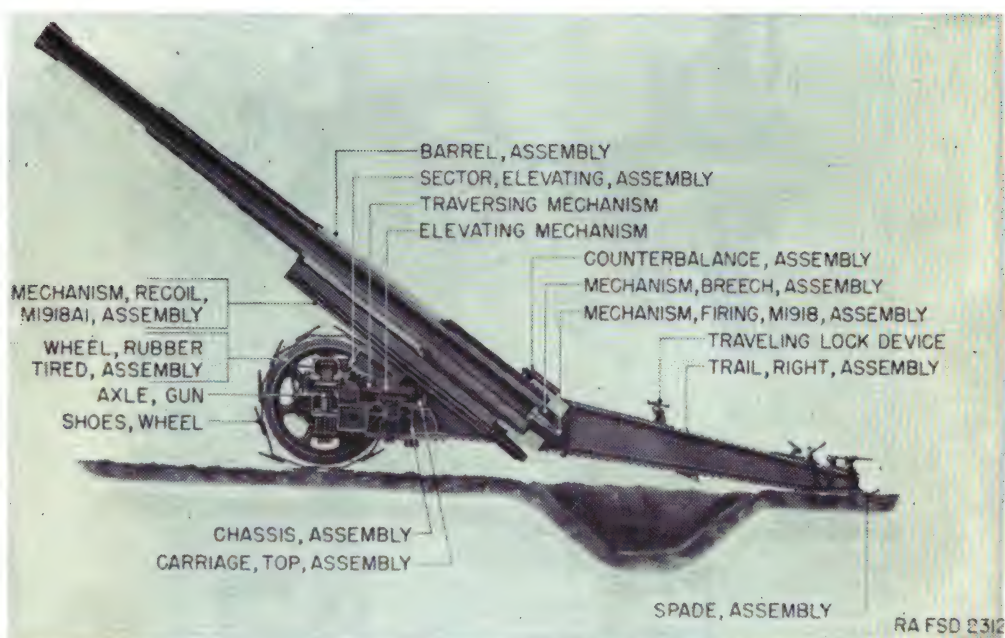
155-mm gun carriage—longitudinal section in battery.
